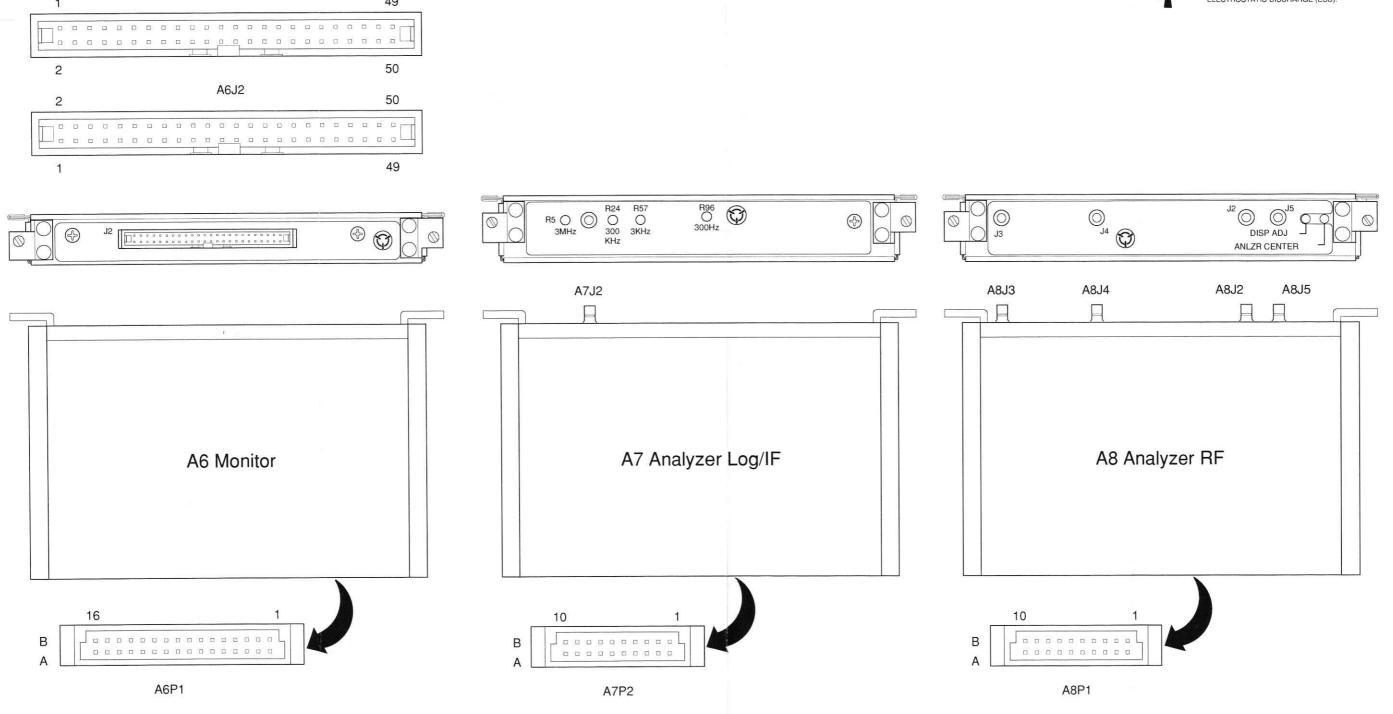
34A5A3A2 TDMA Motherboard Assembly Component Locator and Wiring Diagram (Sheet 4 of 4)
